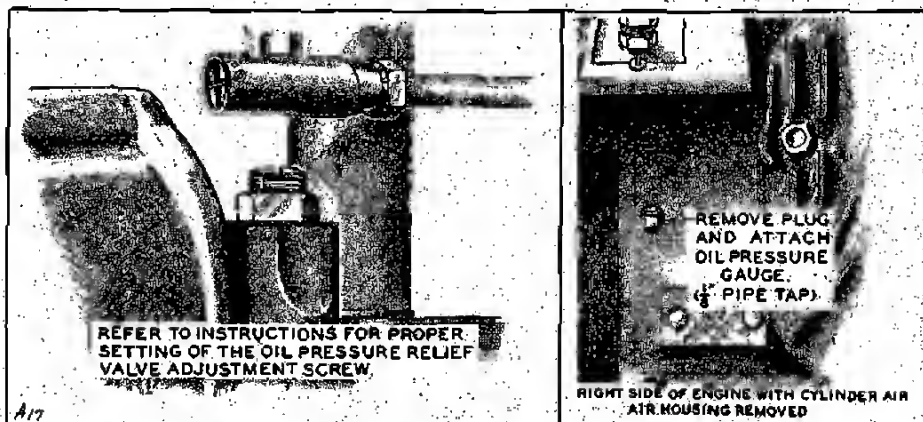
OIL PRESSURE RELIEF VALVE ADJUSTMENT
